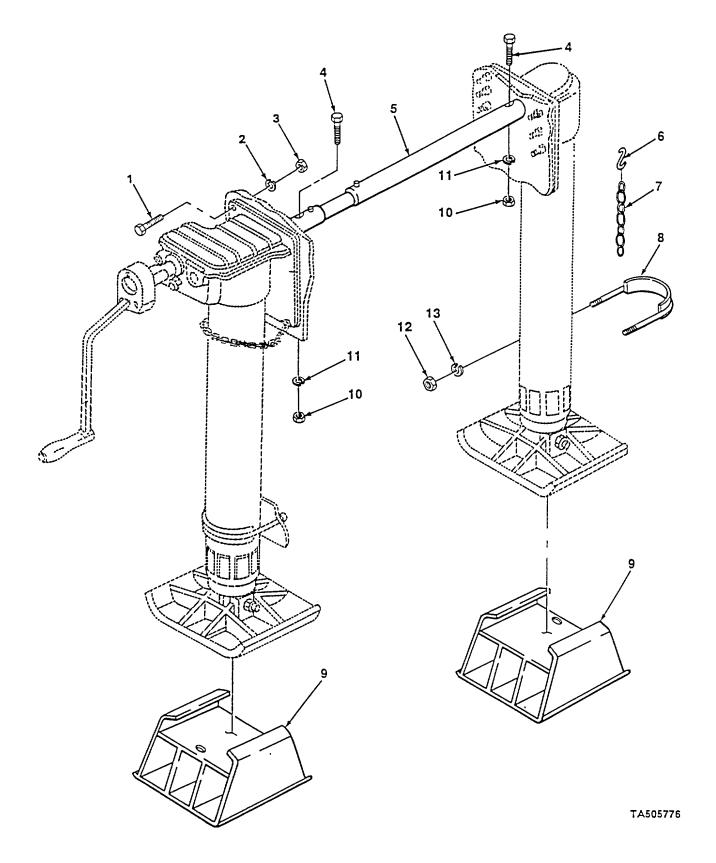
LANDING GEAR ATTACHING PARTS.
